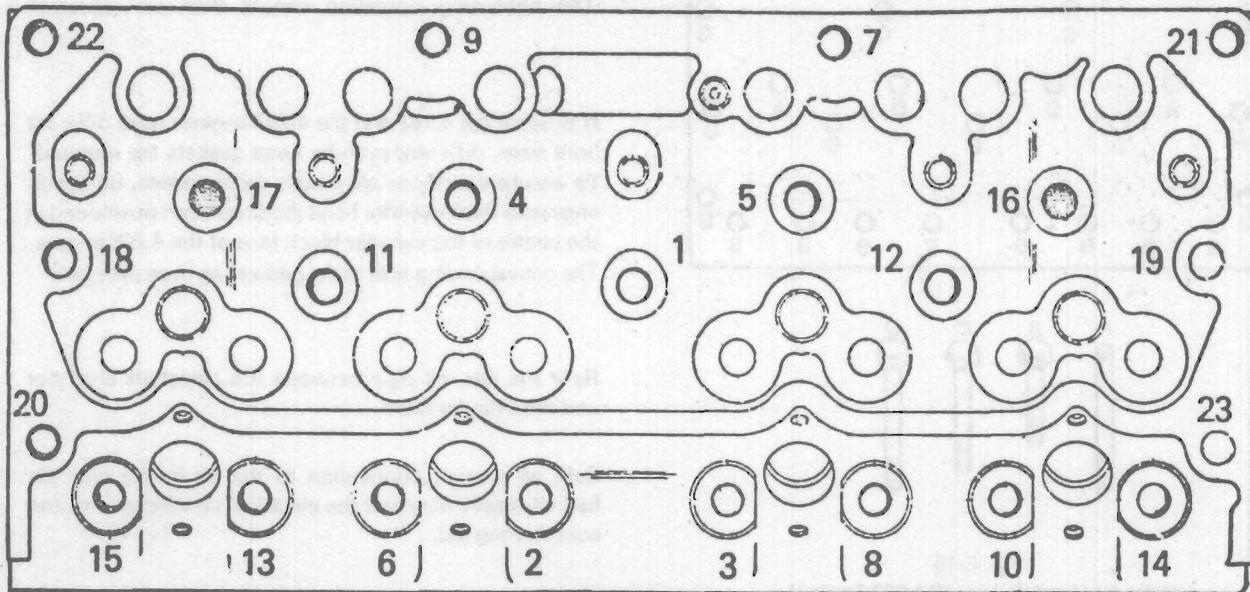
Cylinder Head Tightening Sequence (D4.203 Engine)
